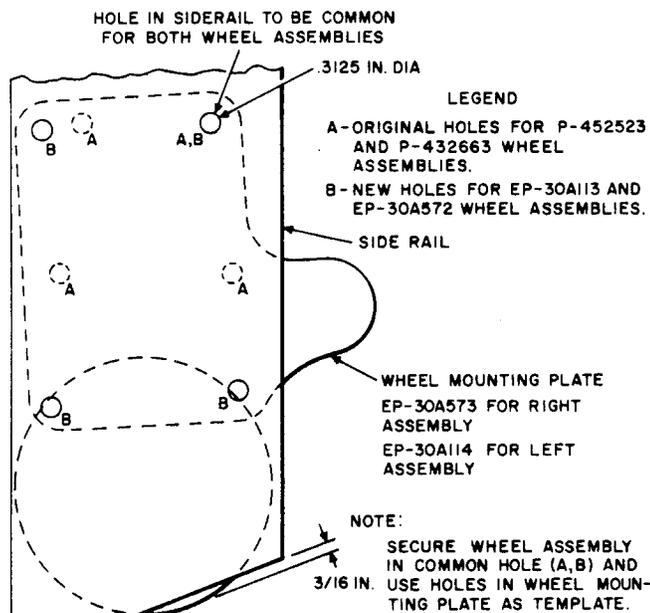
Modification of Side Rails of Portable-Type Rolling Ladder for Wheel Assembly Replacement
